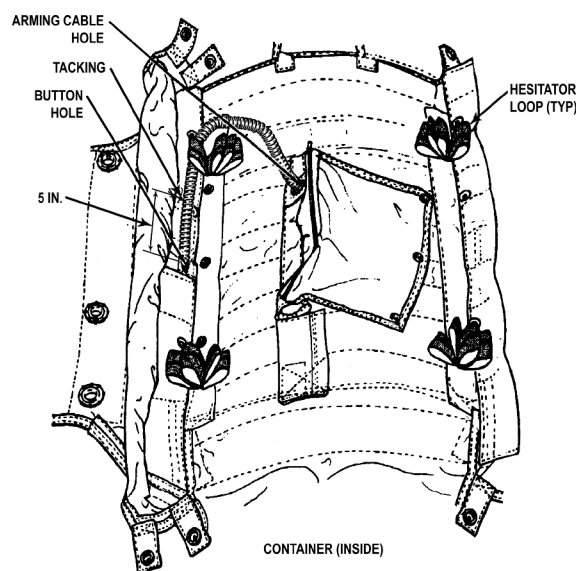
Tacking of Arming Cable Housing to Inside of Container
